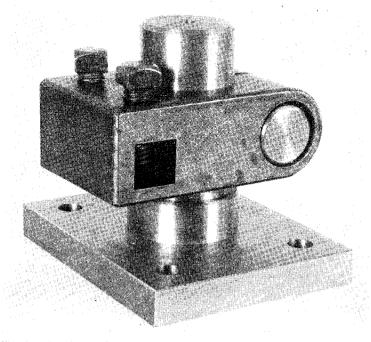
Attachment for mounting the Norman toolholder on the cross-slide
